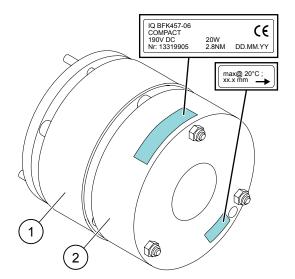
Double brake - INTORQ (SL05-SL10, SR25)
